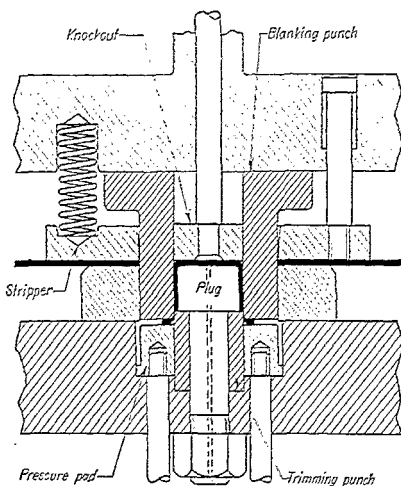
Blank, draw, and pinch-trim die for producing shells.³
